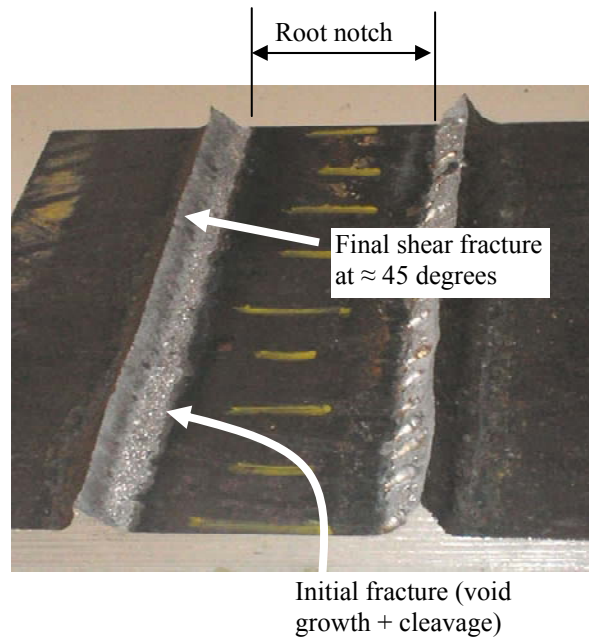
Photograph of fractured surface showing initiation straight ahead of root notch followed by shear fracture (Test #16)
